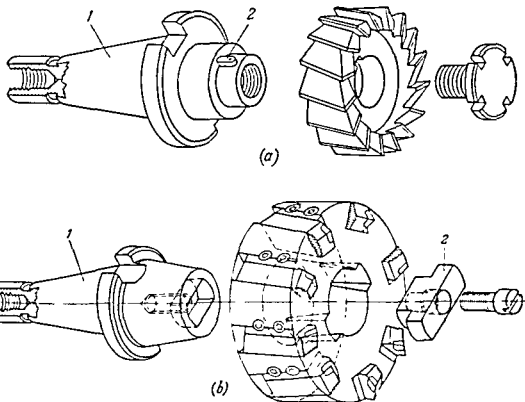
Holding shell end mills and face milling cutters on stub arbors
